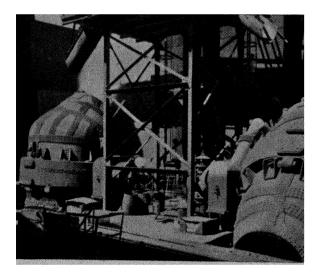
Layout of Bessemer plant. (By courtesy of the "British Steelmaker ".)
